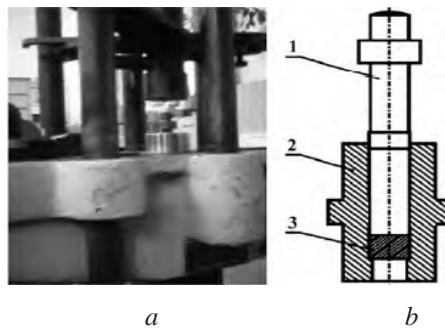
Working part of the YBM-50 machine with installed press device (a), press device (b)
